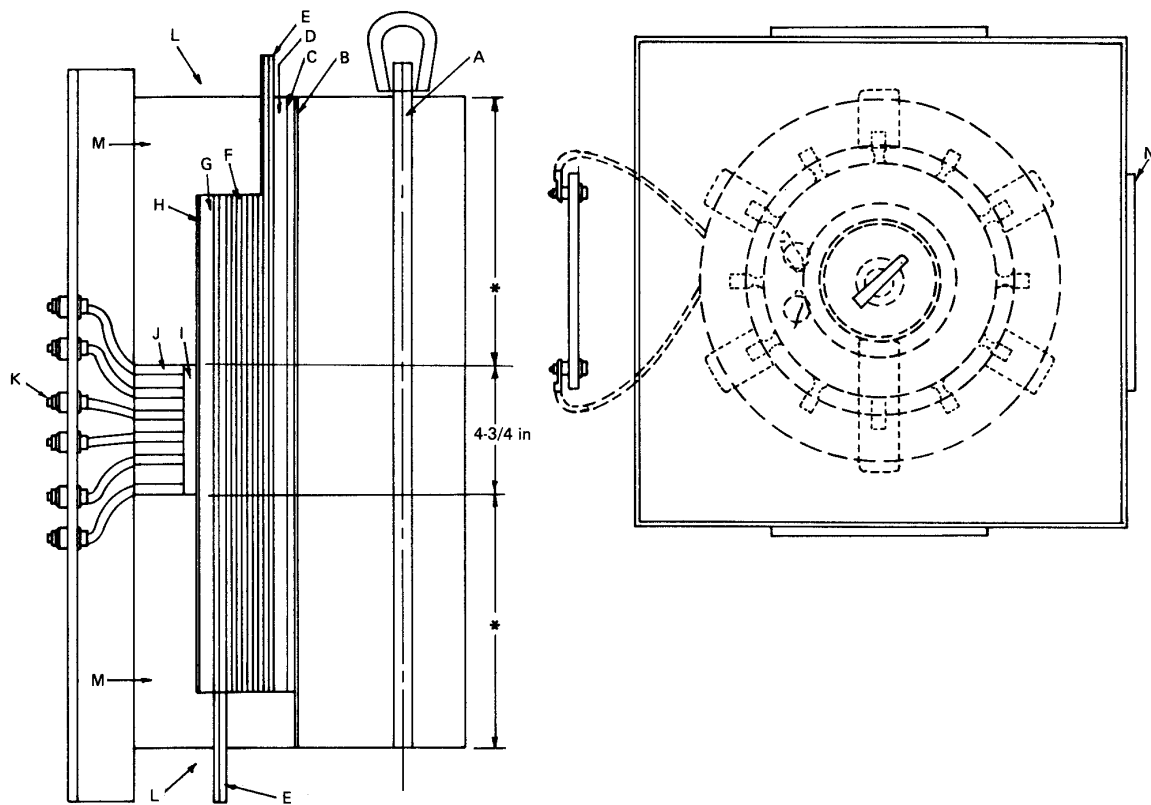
Side View of Model Containing Barrel (Helical Winding) Wound High Side and Strip Wound Low Side
